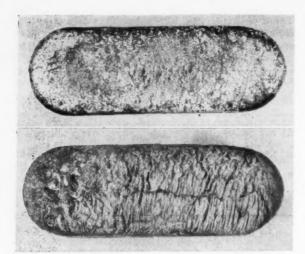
(top)—Test specimen containing 0.2 per cent aluminum. Bright, smooth surface. Fig. 8 (bottom)-Test specimen containing < 0.01 per cent aluminum. Dull, rough surface.
